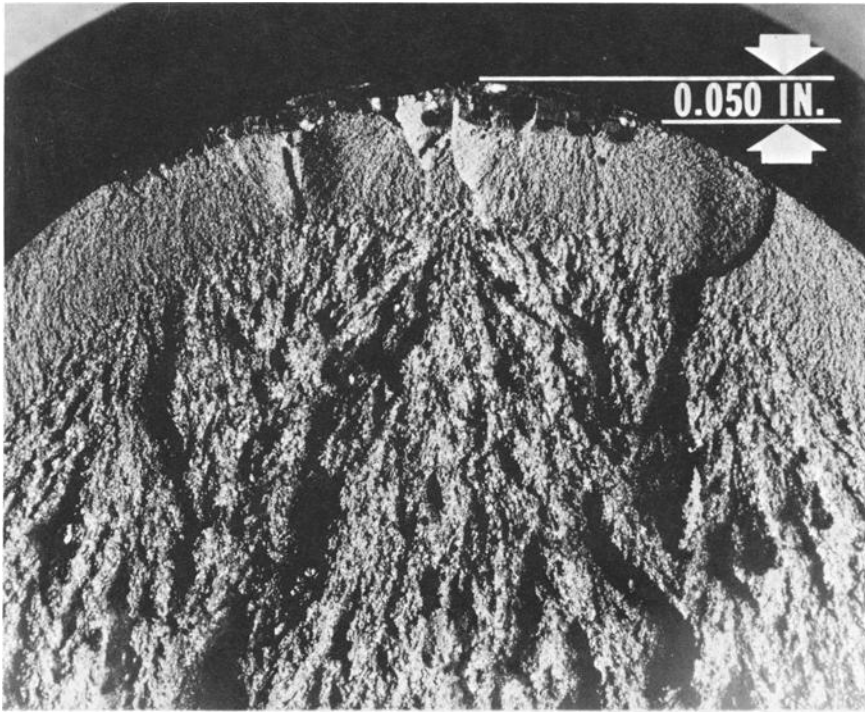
The specimen of Fig. 17 broken open. The depth of the cracking from cycling is shown by the discoloration due to fretting corrosion.
